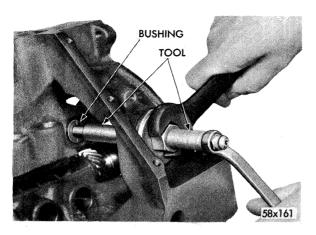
Burnishing Distributor Drive Shaft Bushing
